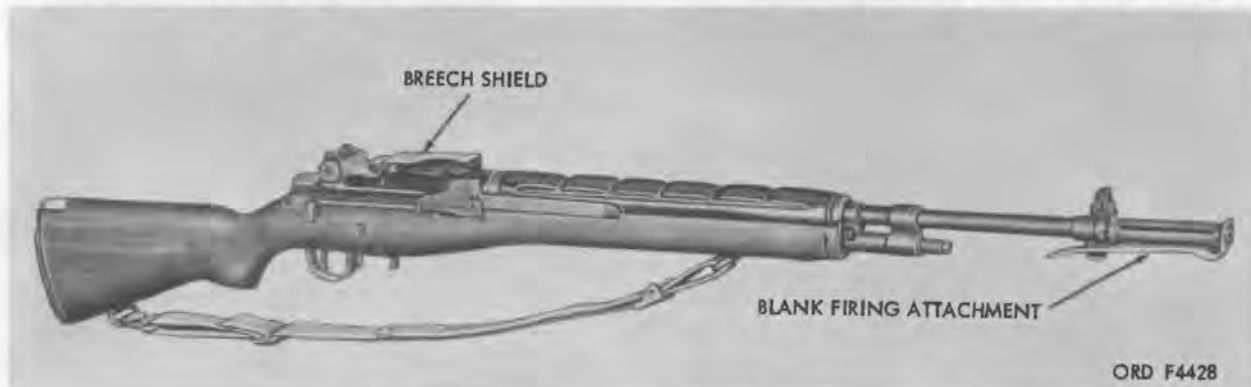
7.62-mm rifle M14 with blank ammunition firing attachment and breech shield installed - right front view.
